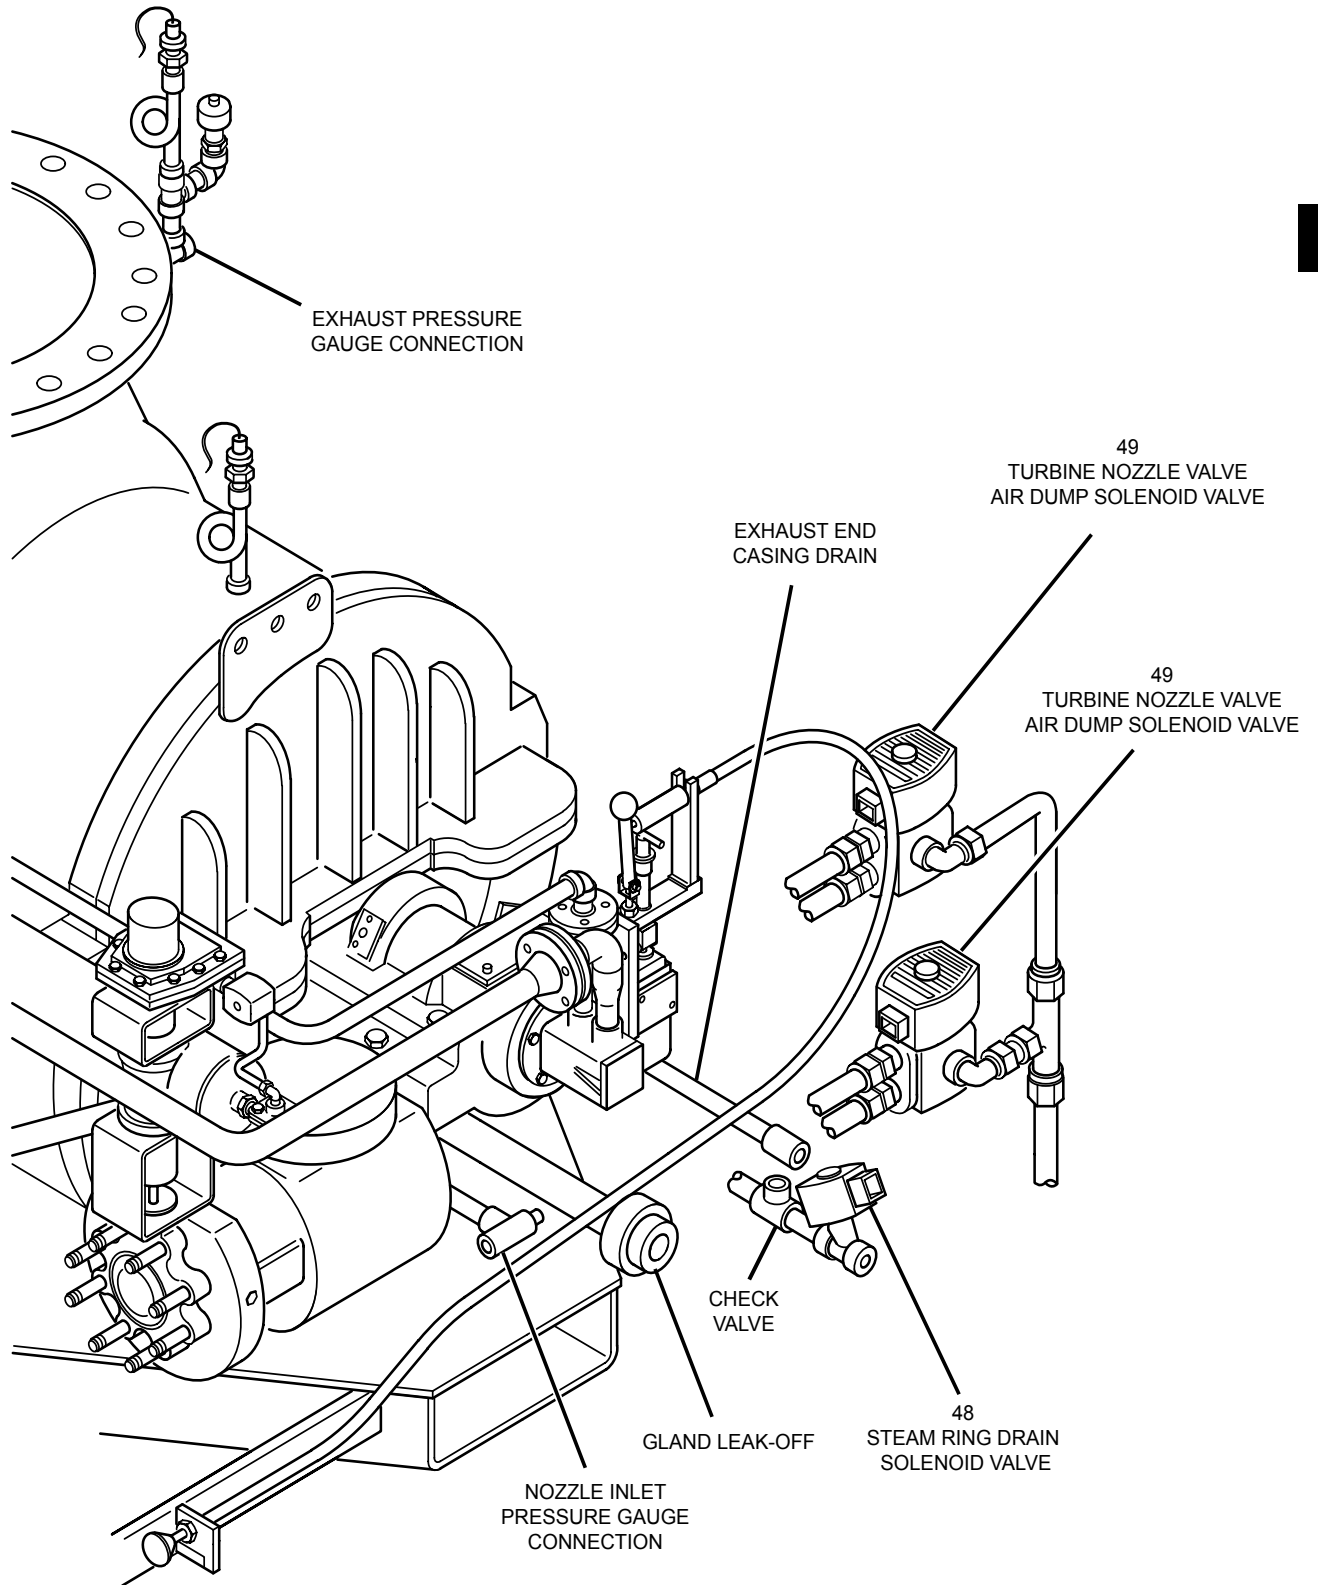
TURBINE STEAM RING DRAIN & NOZZLE VALVE AIR DUMP SOLENOID VALVES
